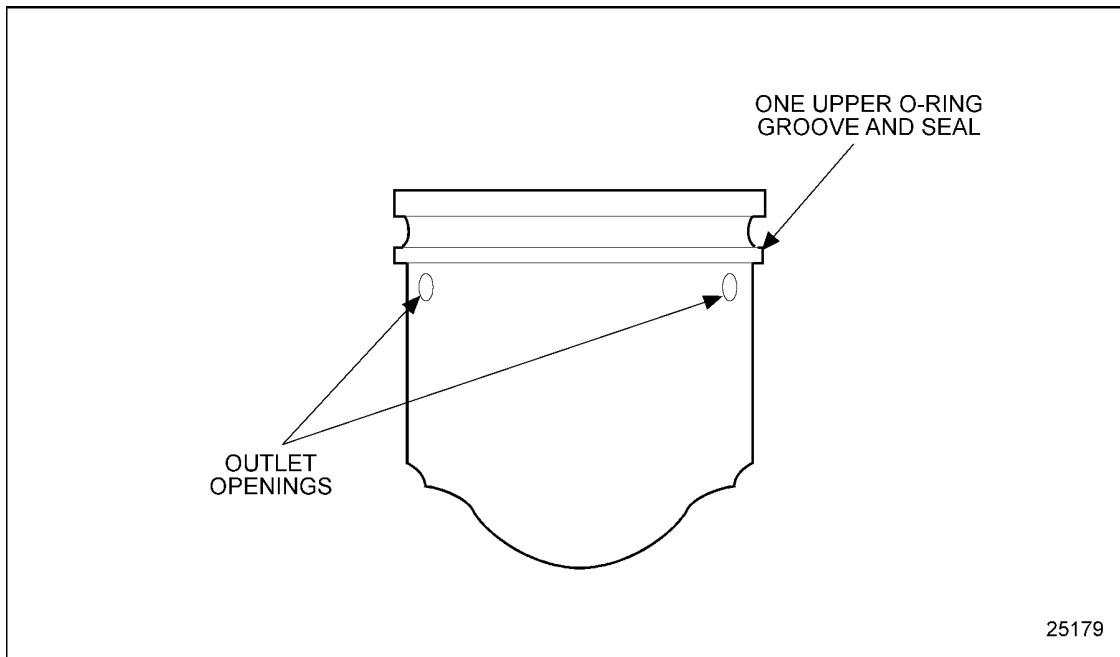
Fuel Outlet Openings in the Fuel Injector Body
